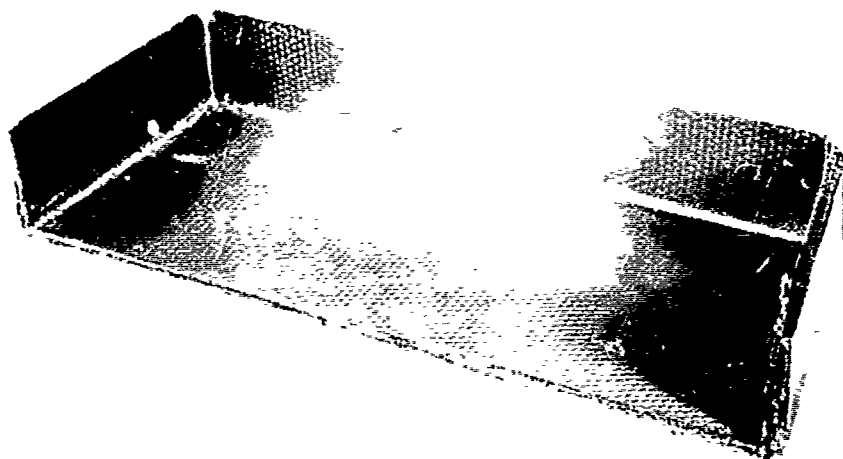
Molded Fitting – Compacted Pan Prior to Trim
